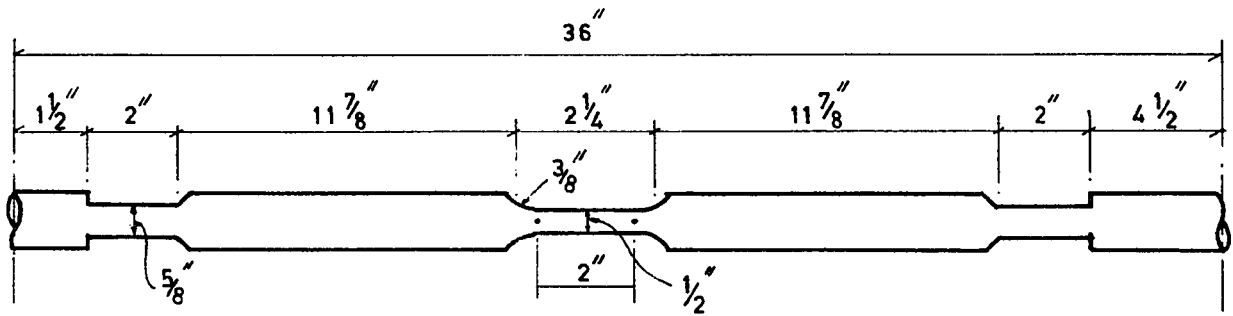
DIMENSIONS OF TENSION TEST SPECIMEN
